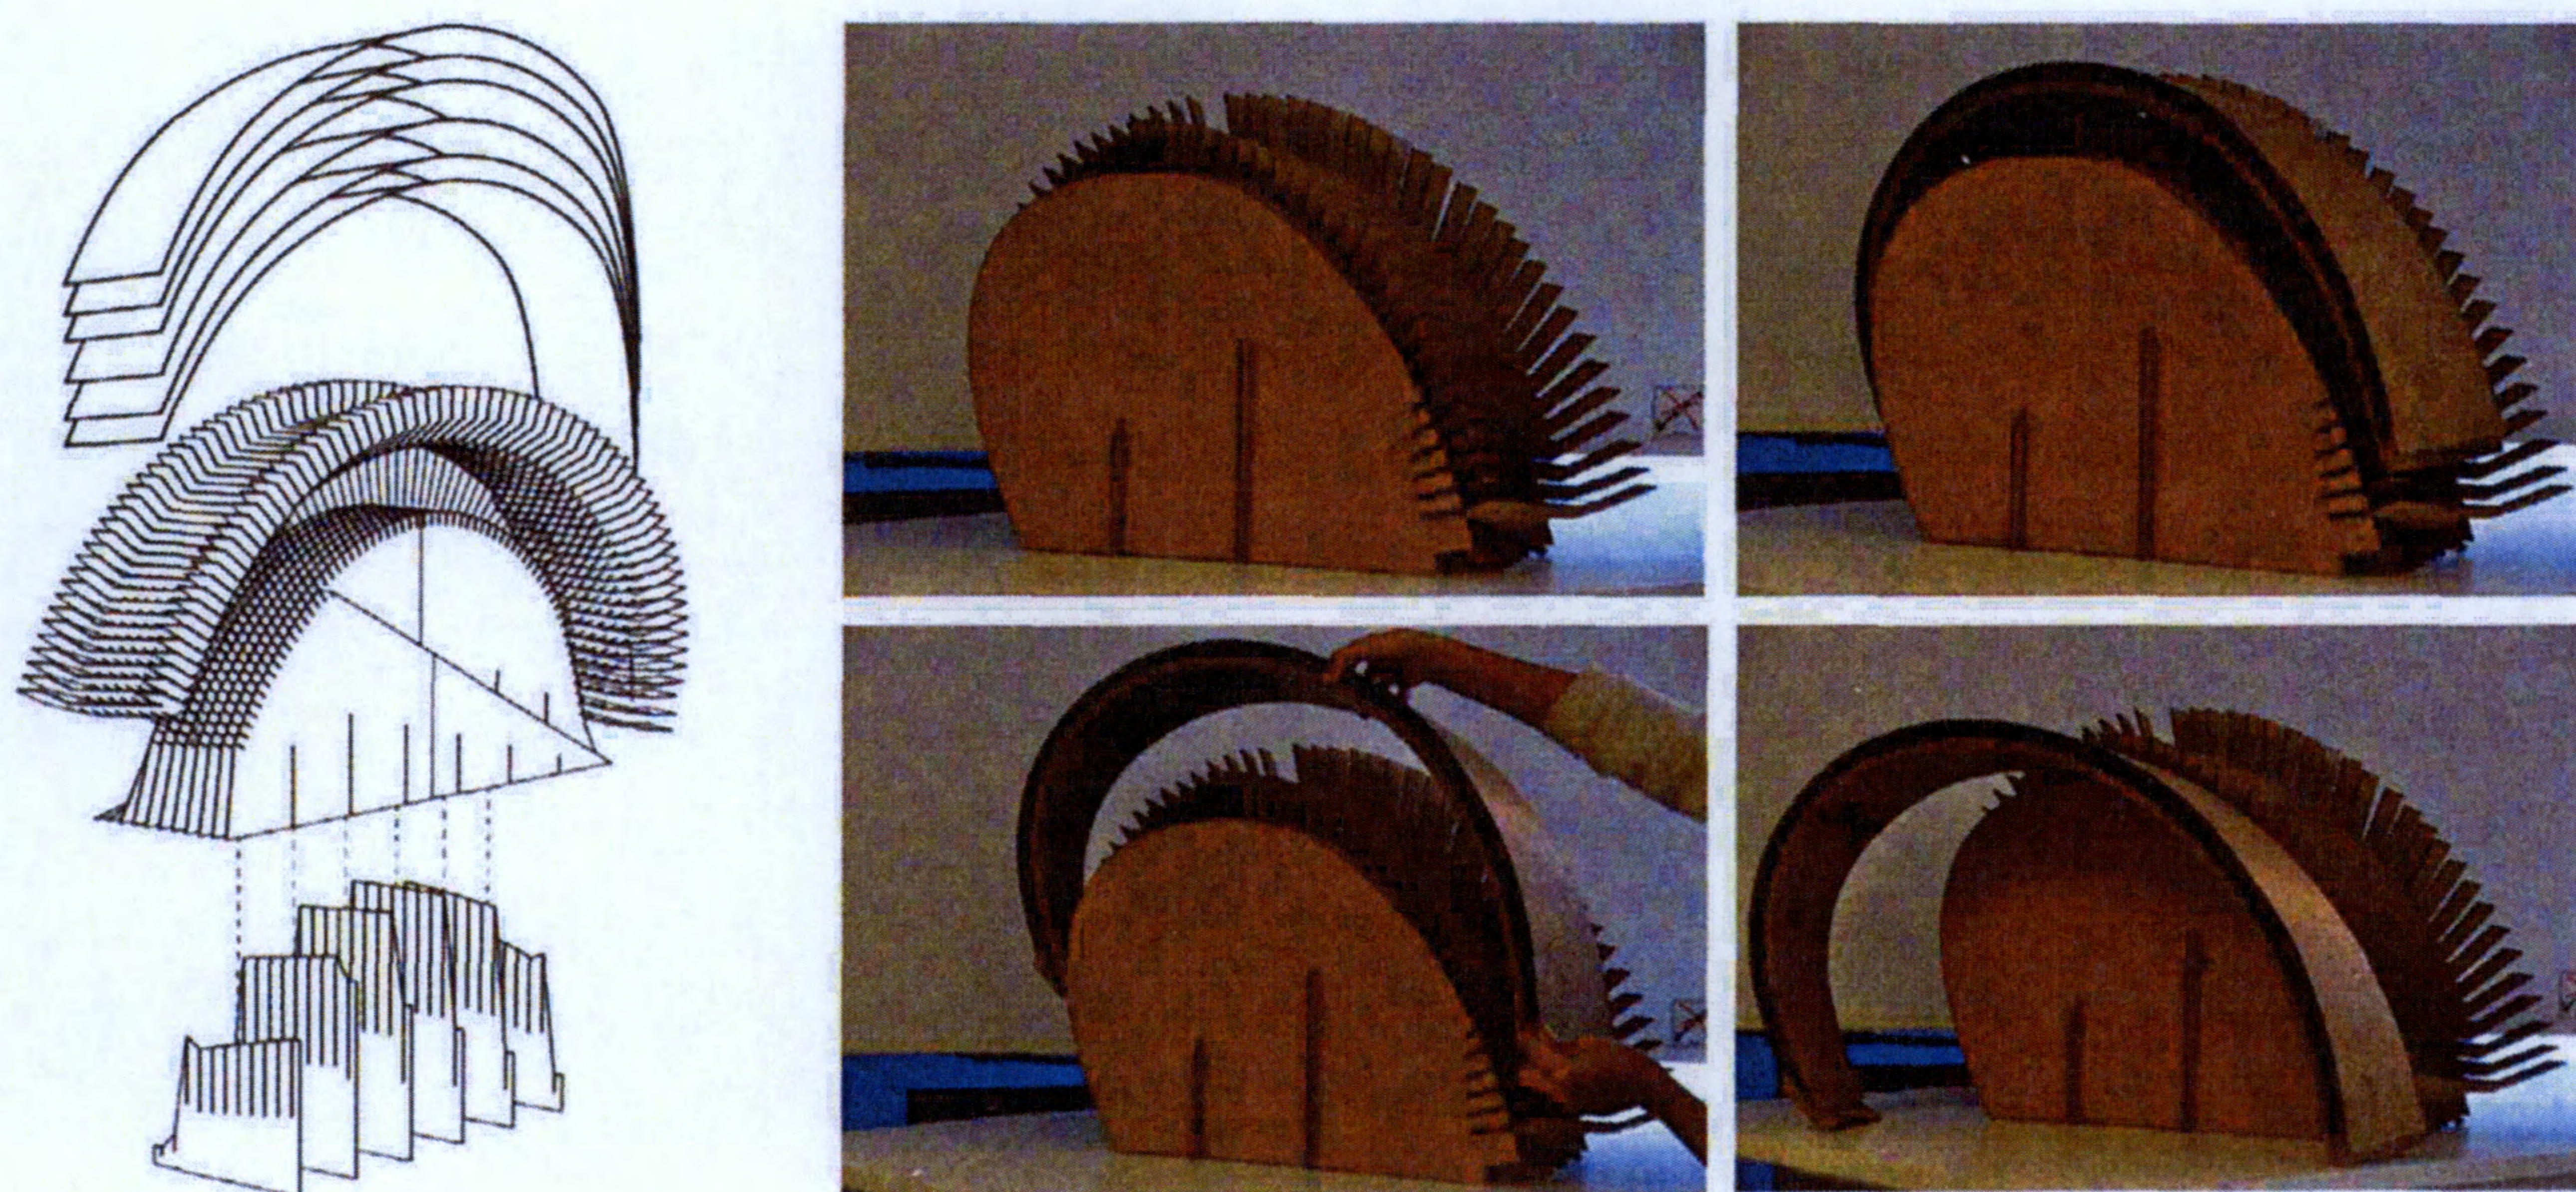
The axonometric drawings of the mold, which was, used for forming stripe components (right). Forming stripe components on the mold at small scale (left).
